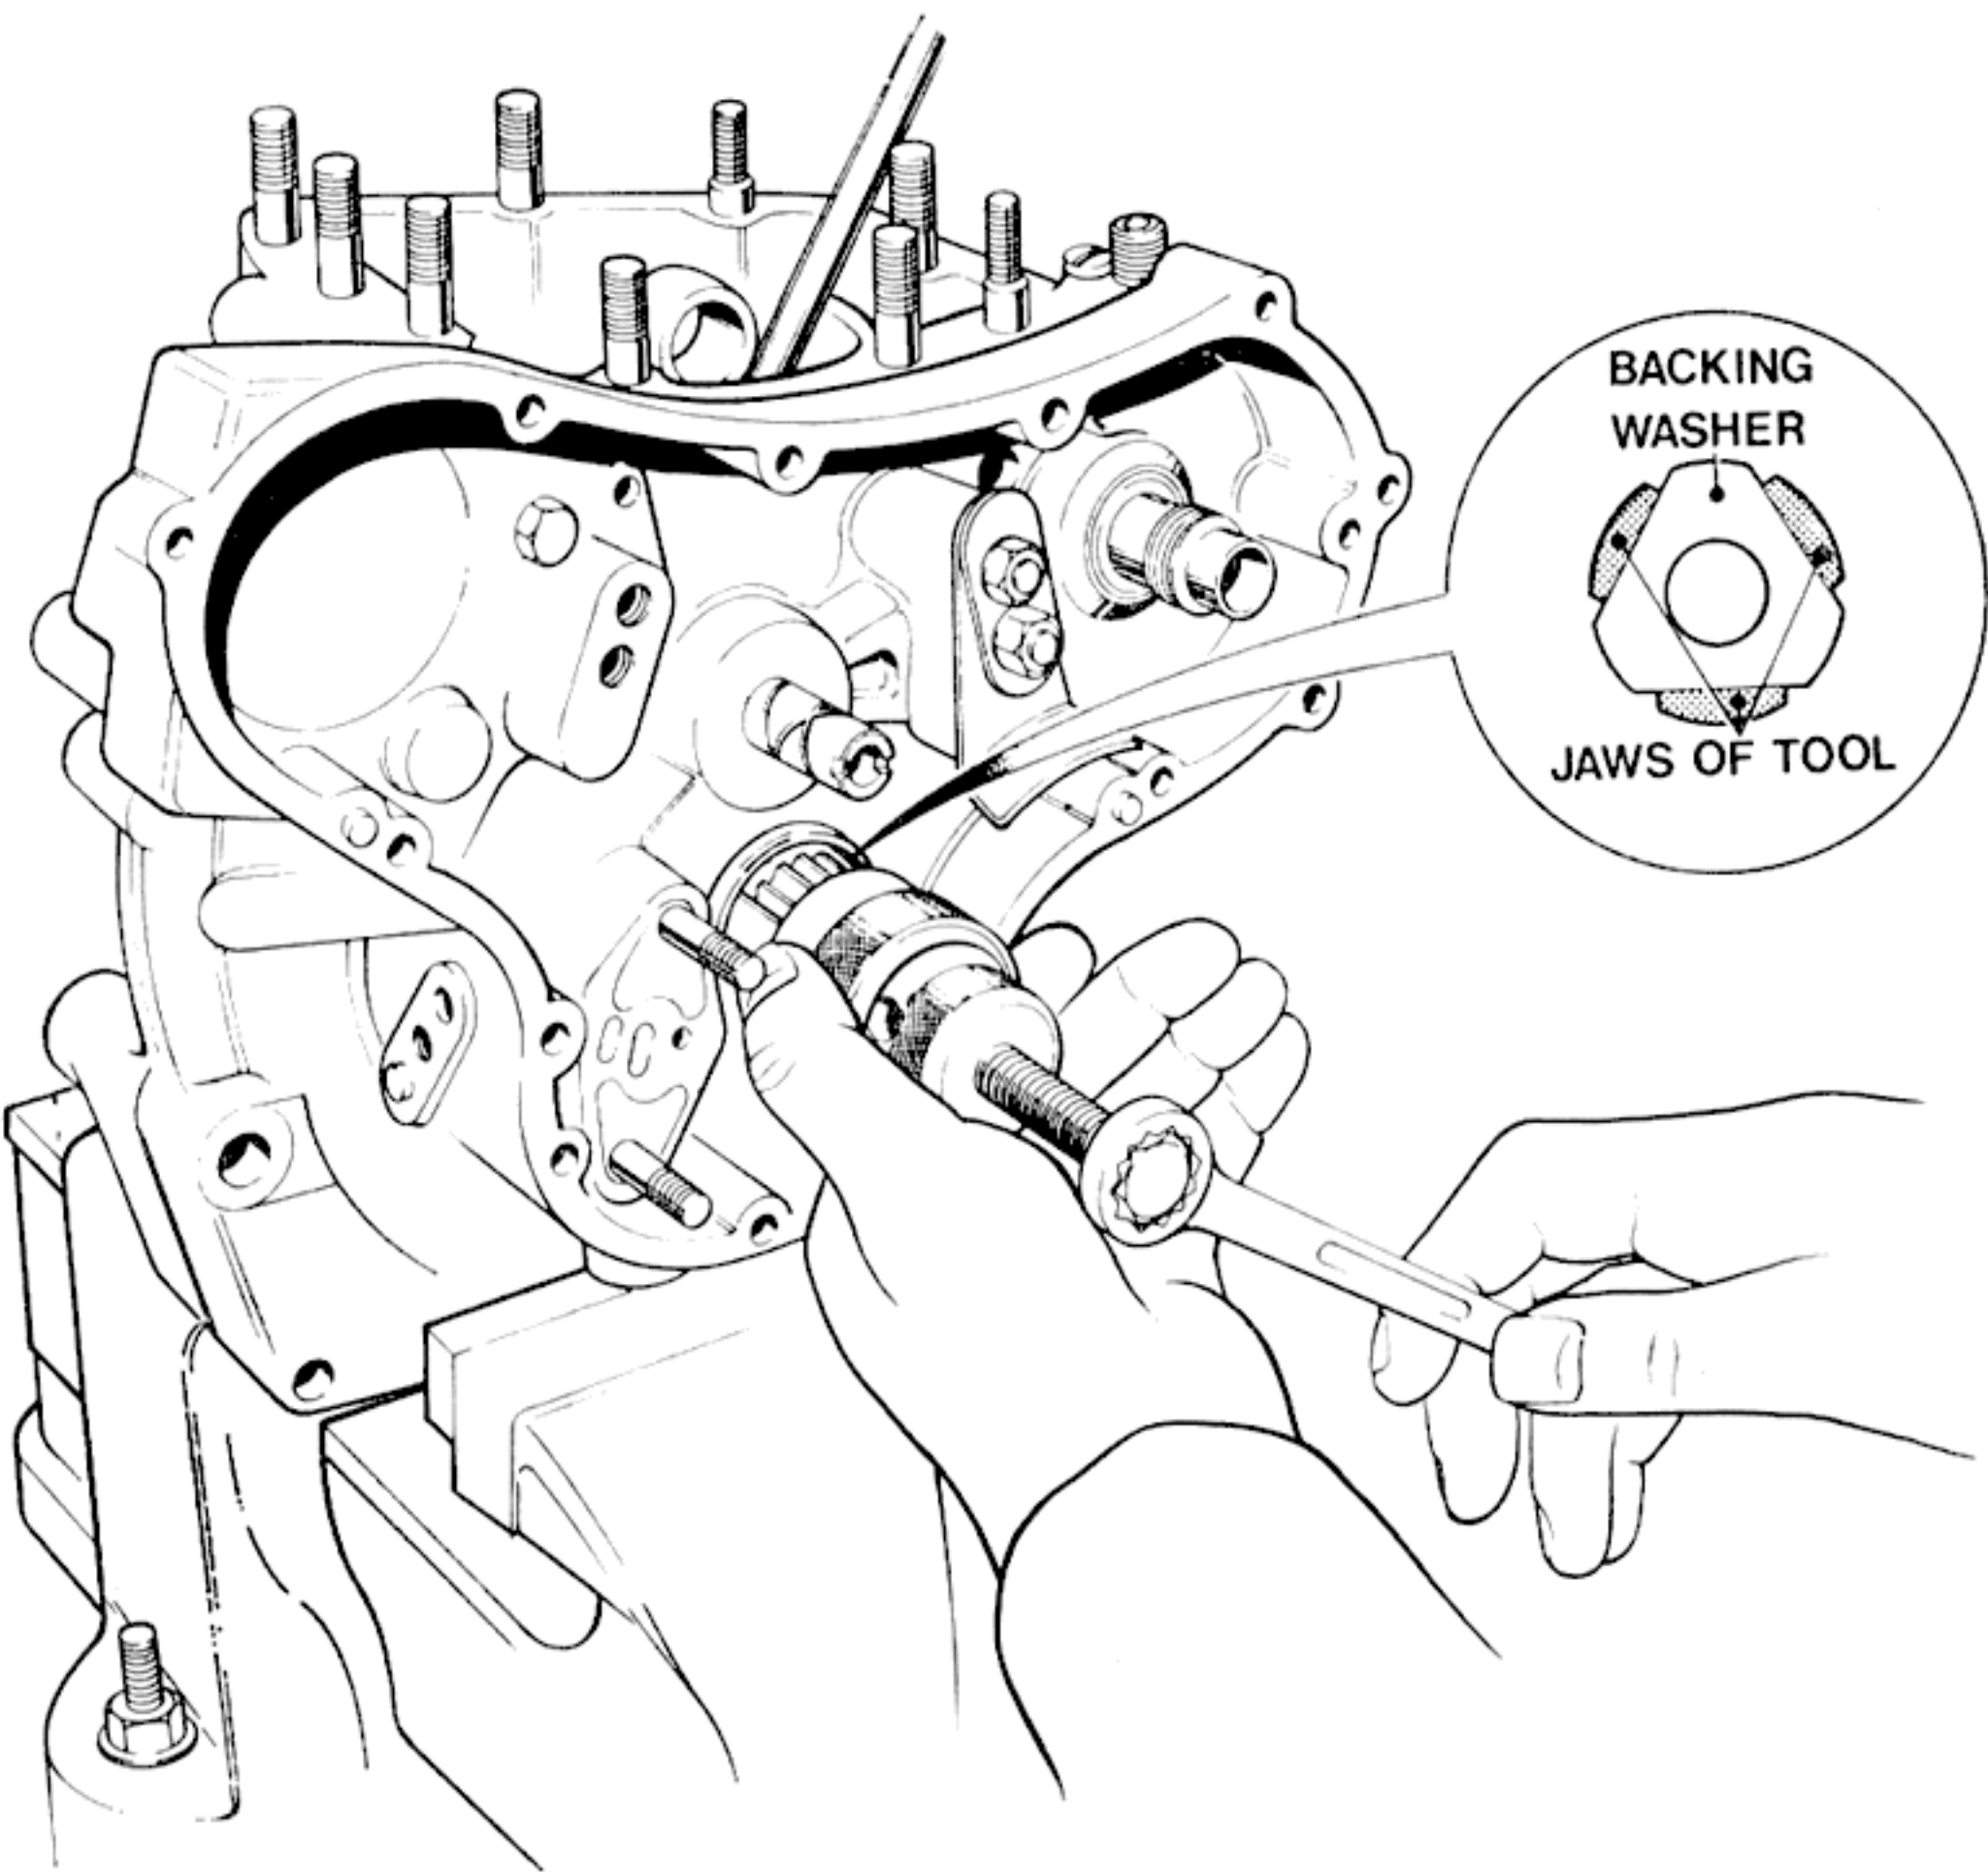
Preventing flywheel turning by use of a bar lodged in a flywheel balance hole
